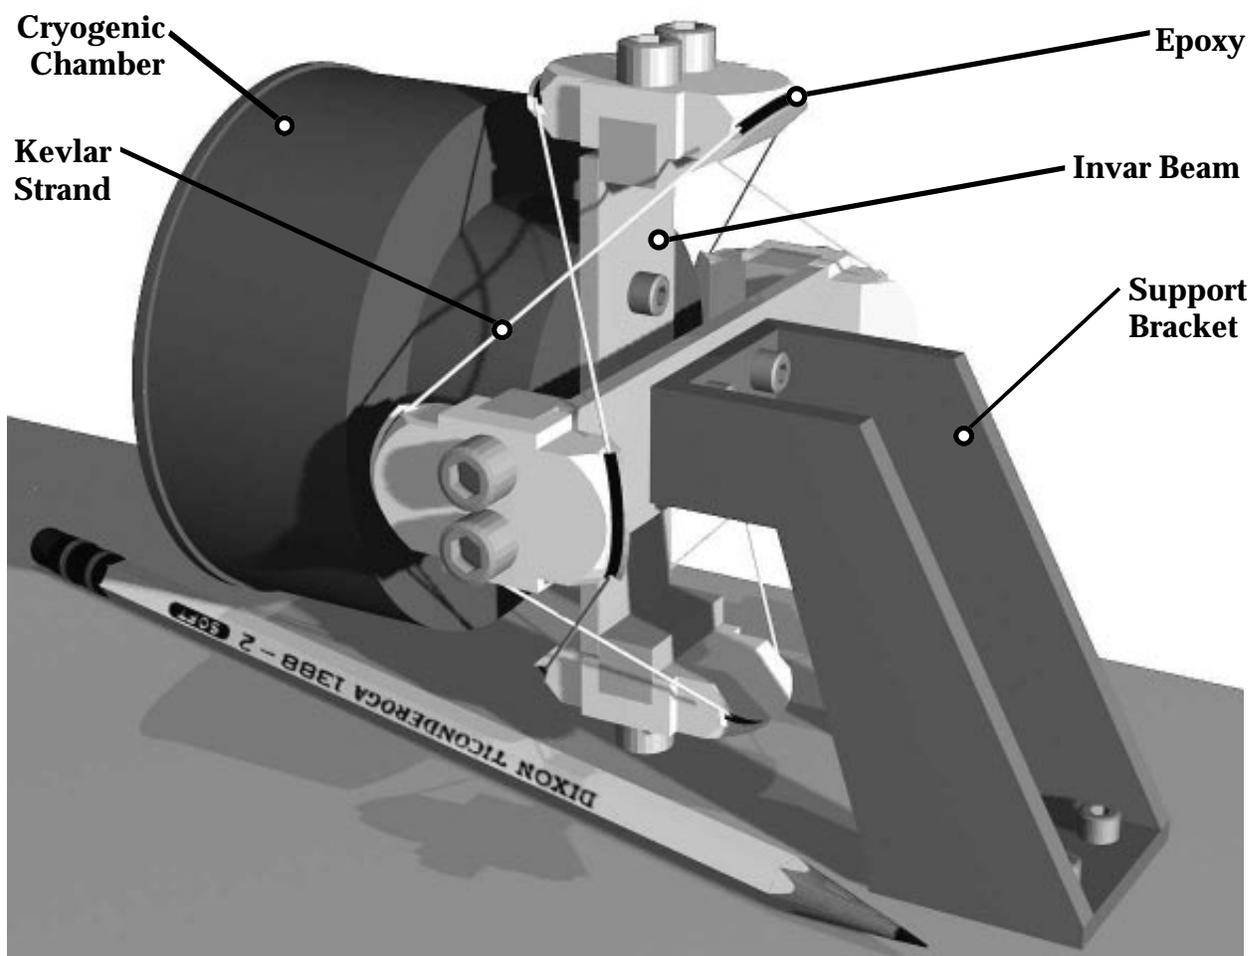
Attachment fixture using Kevlar strands. A cryogenic chamber is shown mounted on one side of the fixture and the other side of the fixture is attached by a support bracket to a higher-temperature base plate.
